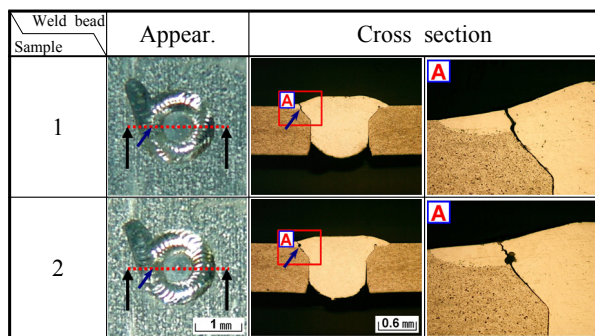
Cross section of welds and leak position by improved press head (A1090 annealed ball, 150MPa)
